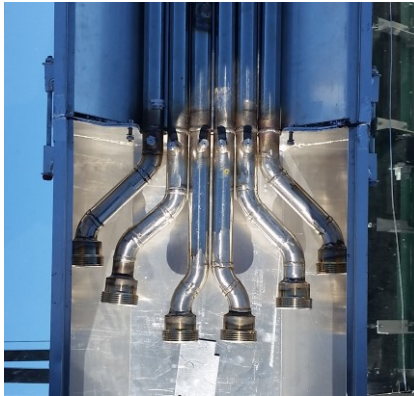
Extensions welded on the extremities of the absorber tubes.
